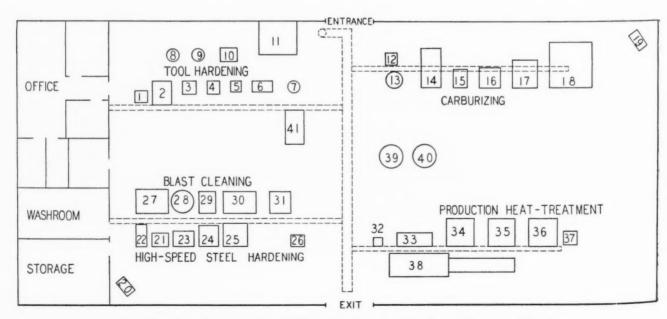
Plan of a Heat-treating Plant Laid out for Handling a Variety of Work
